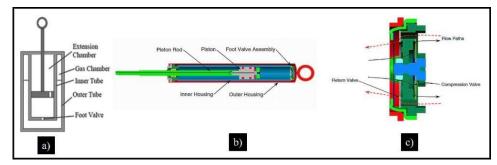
a) Principle of Twin Tube damper, b) Section view of twin tube damper, c) Details of foot valve [16]
